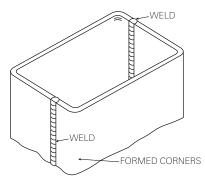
Use of bending to reduce welding and give clean corners
